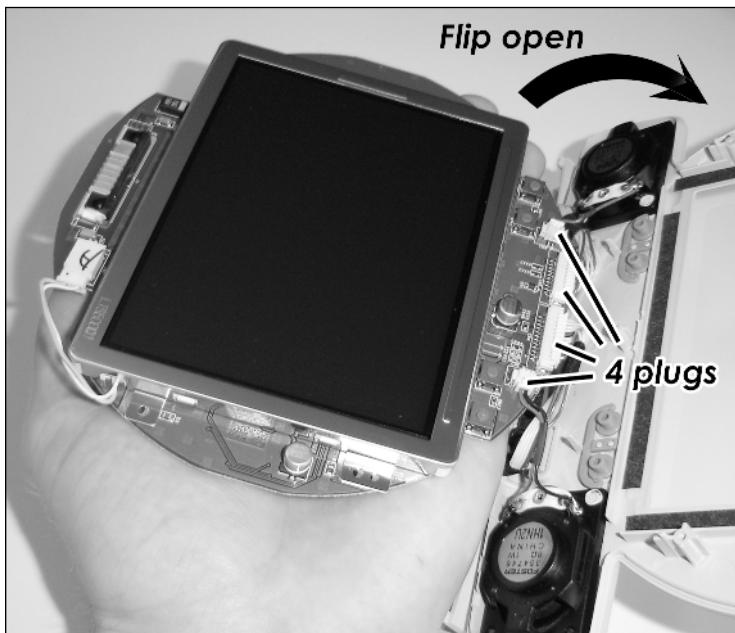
How to hold the unit, and which plugs to remove.
